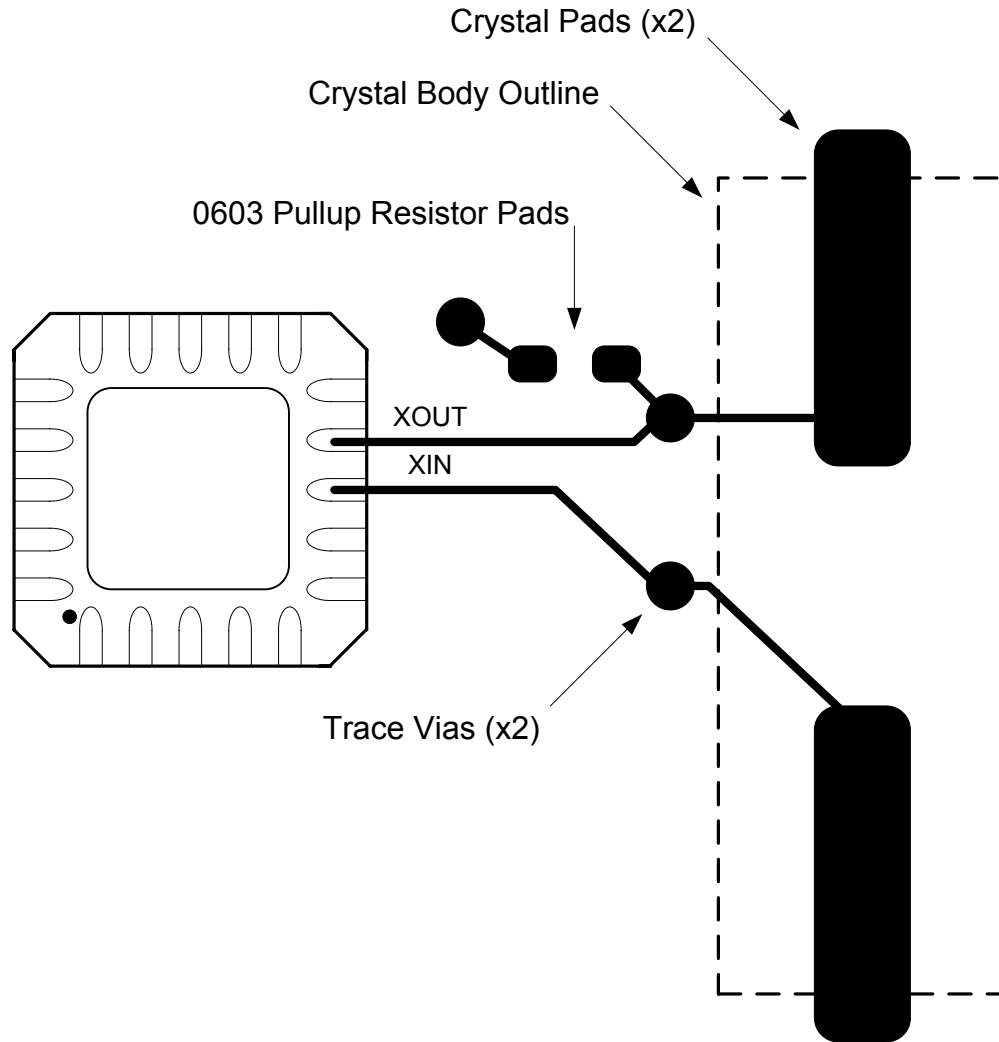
Four-Layer PCB Layout for Crystal (Top View)
